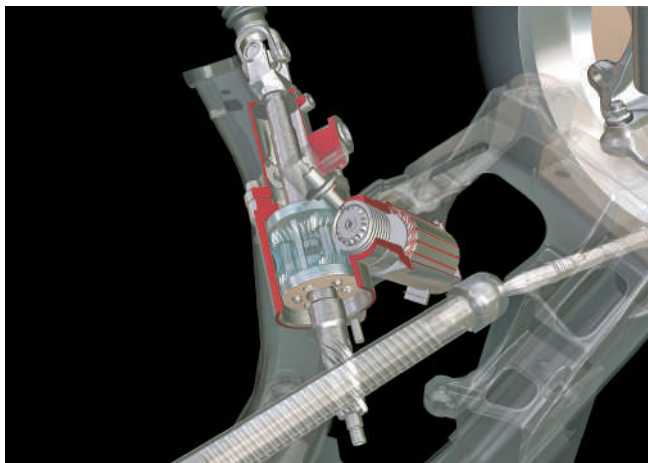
The planetary gearset and electric motor that turn the road wheels when the steering wheel is turned.
